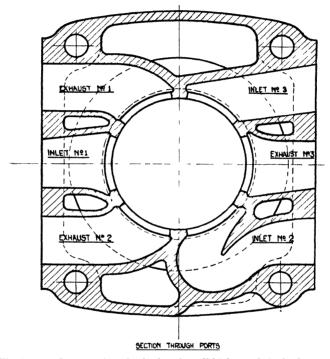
Cross-section of cylinder of small high-speed single sleeve-valve engine showing anti-swirl baffle in one inlet port
